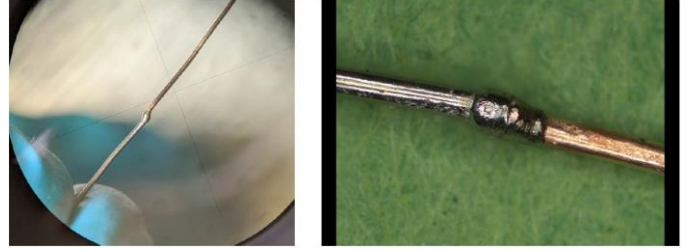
Laser welding tests for wire bonding copper to niobium.
